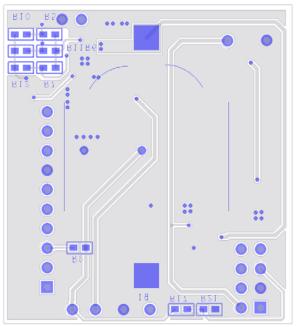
ADP5090-2-EVALZ Evaluation Board Bottom Assembly
